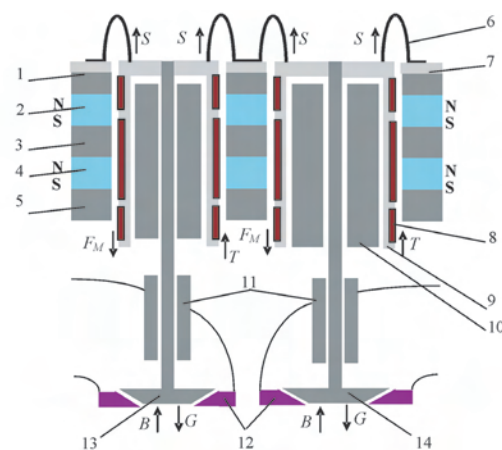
The schematics of the integrated magnetolectric valve driving of configuration 1; 1, 3, 5 – the pole shoe, 2, 4 – sintered magnet, 6 – base, 7 – spring, 8 – coil winds, 9 – coil form, 10 – core, 11 – valve guide, 12 – valve set, 13 – valve
